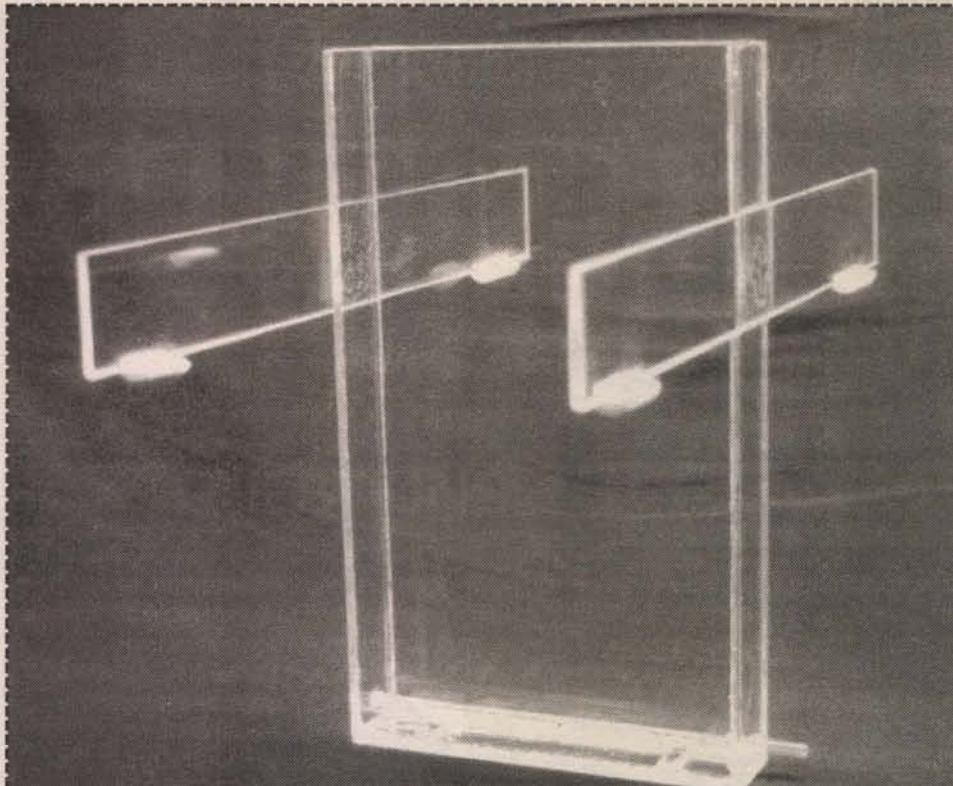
The "Super" etching tank can etch a 5-1/8 by 5 inch PCB while using only two cups of etchant! If needed, the tank can etch PCBs up to 7 by 5-3/16 inches.
